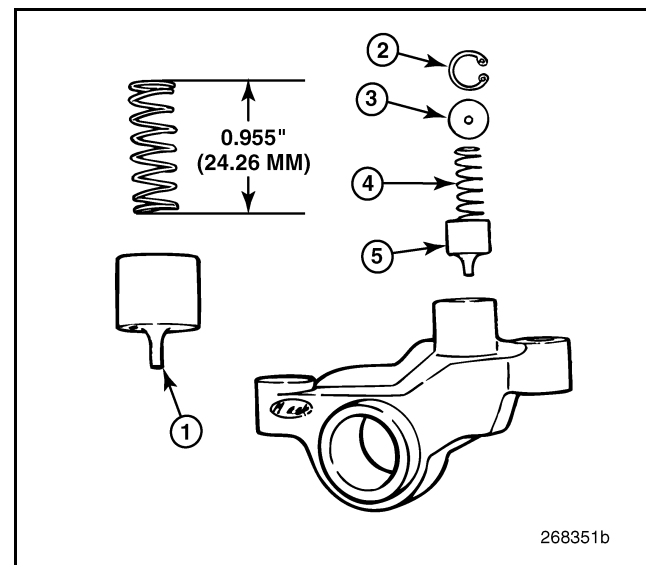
Check Control Piston Spring Free-Length and Pintle Wear
